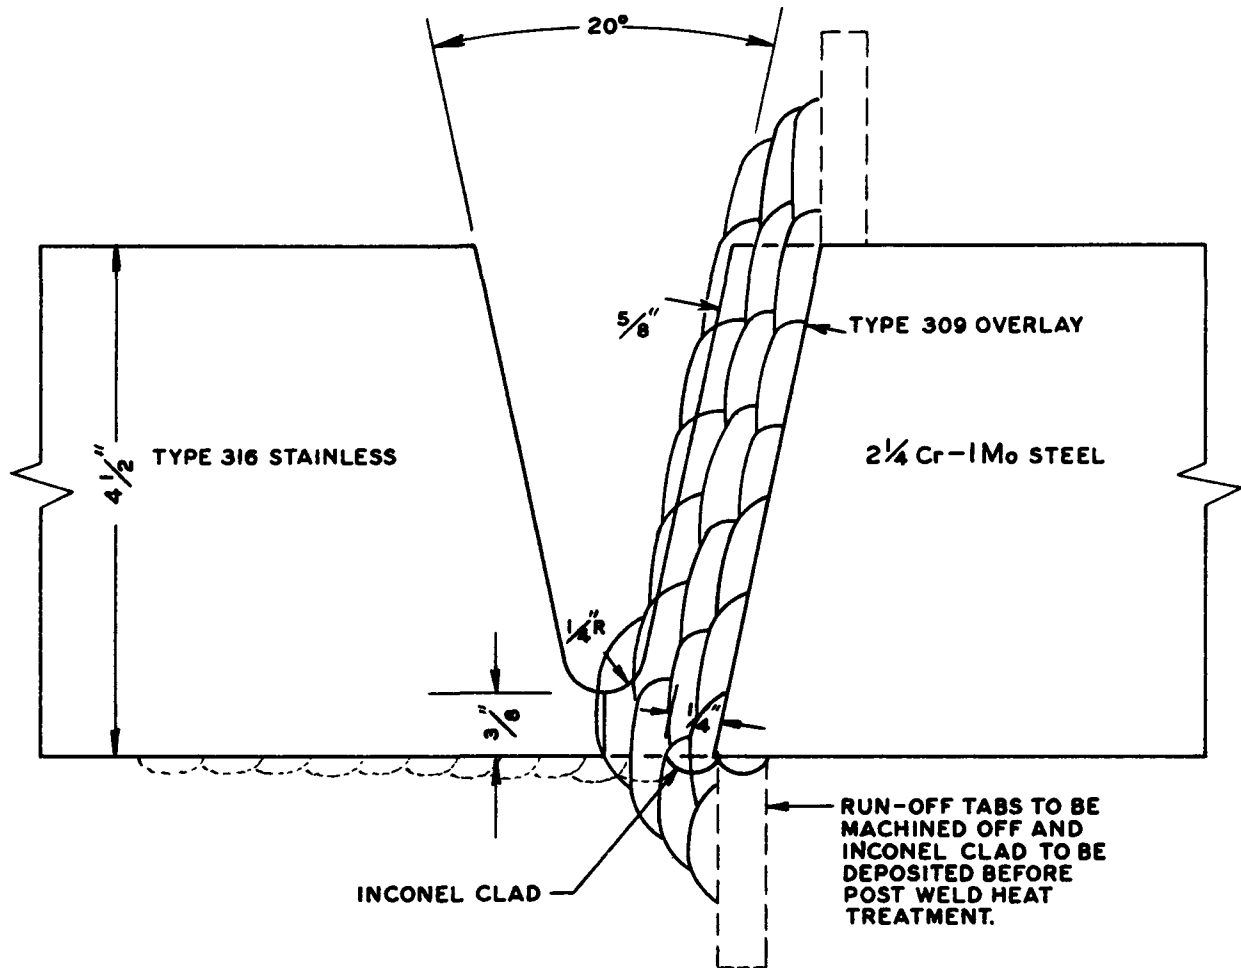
FIGURE A. DESIGN DETAILS REQUIRED FOR MAKING THE TRANSITION WELD.
